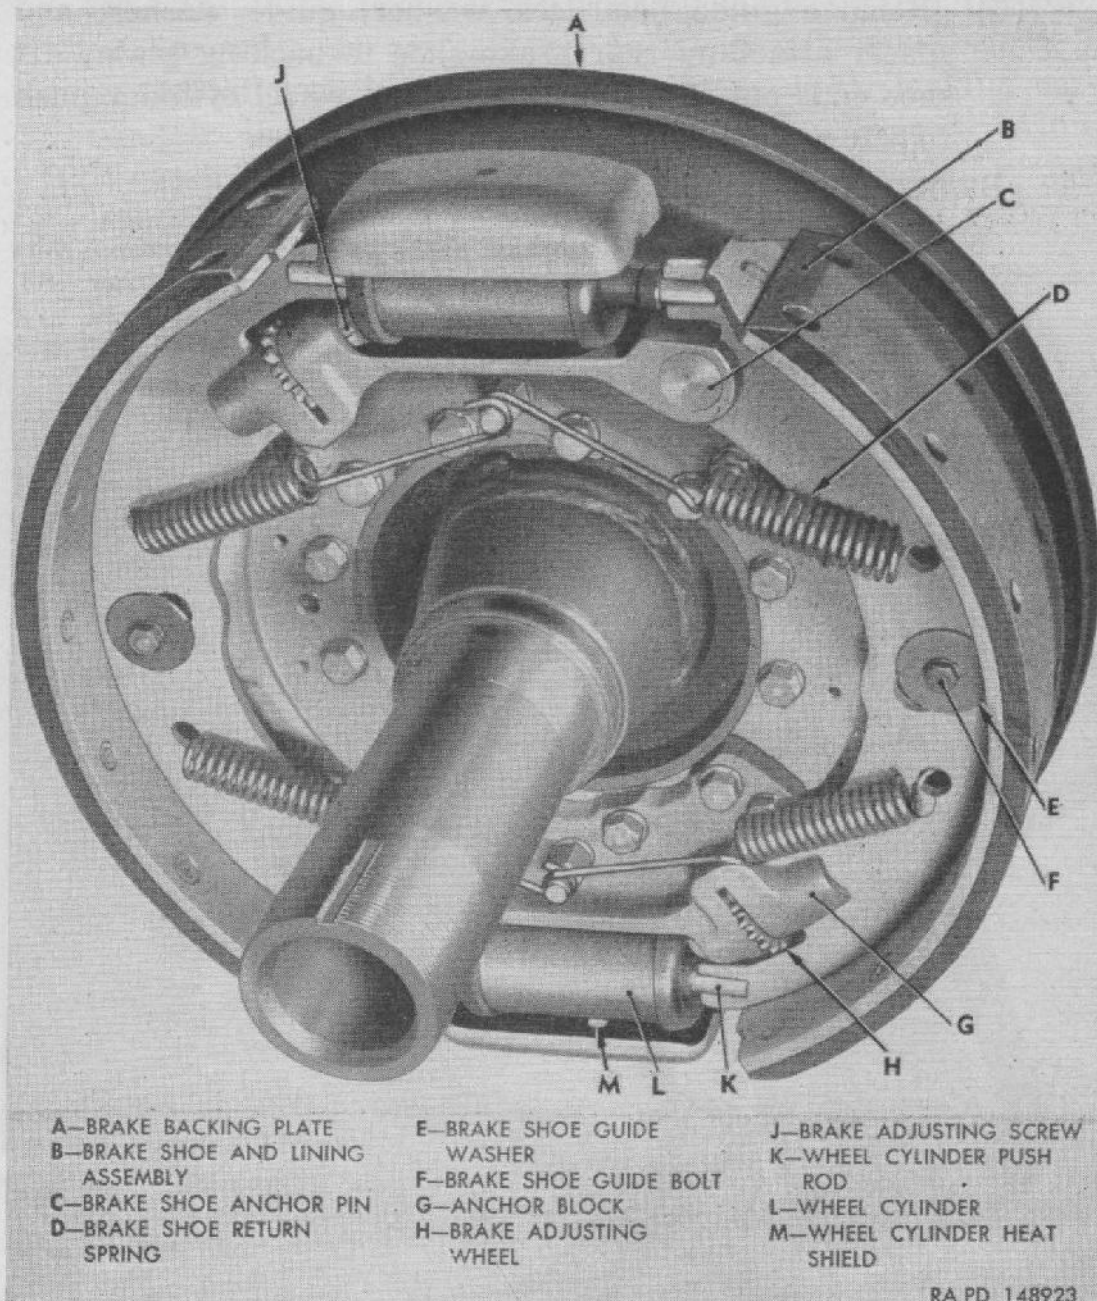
Brake shoes and wheel cylinders installed (rear wheel).
